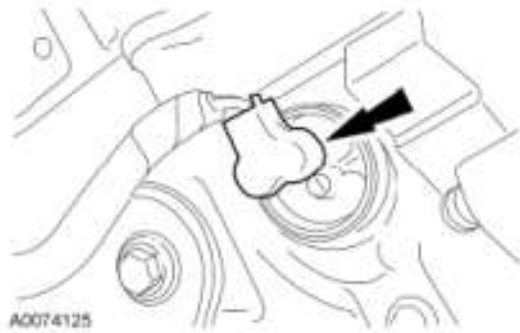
Locating Crankshaft Position (CKP) Sensor Electrical Connector
